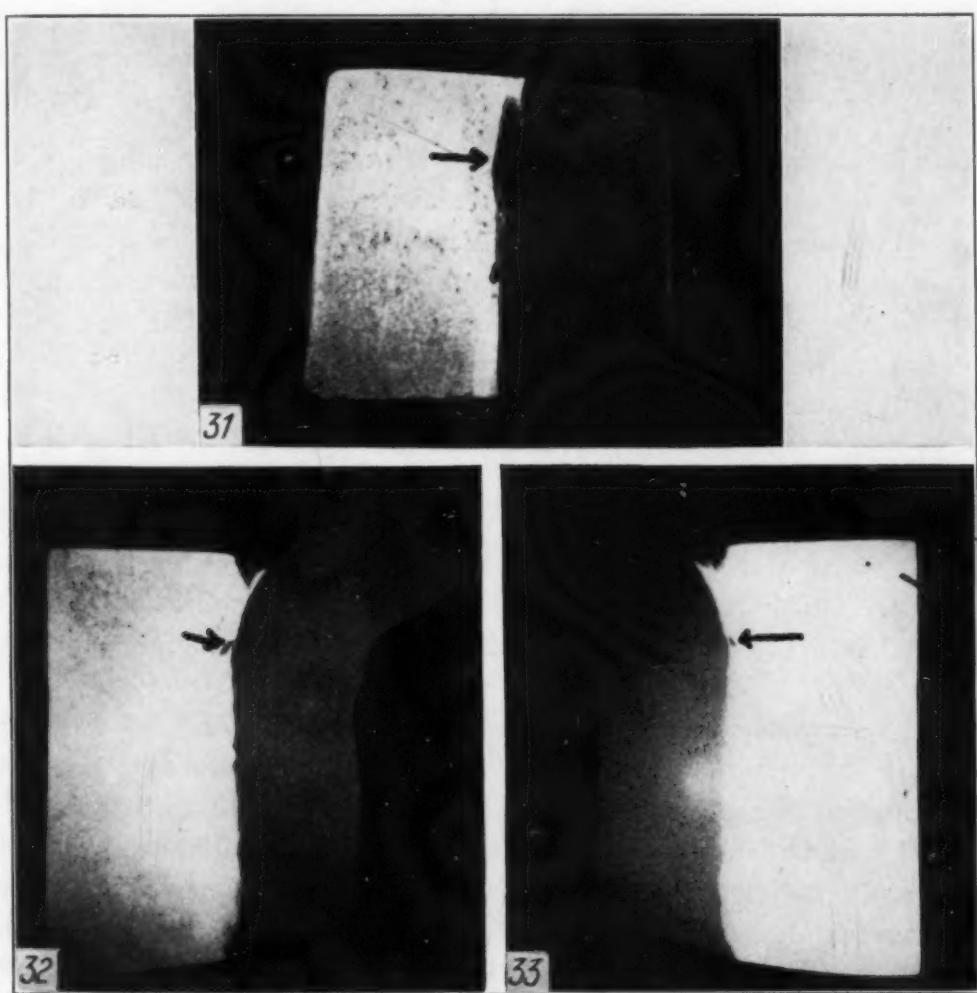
Radiogram $\times 10$. Arrow Shows Flaw in Weld.
